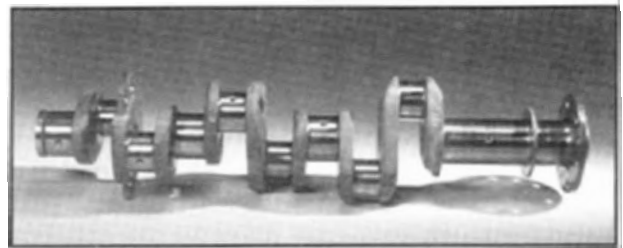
The crankpins in a typical six-throw crankshaft are 60 degrees apart in the firing order.
